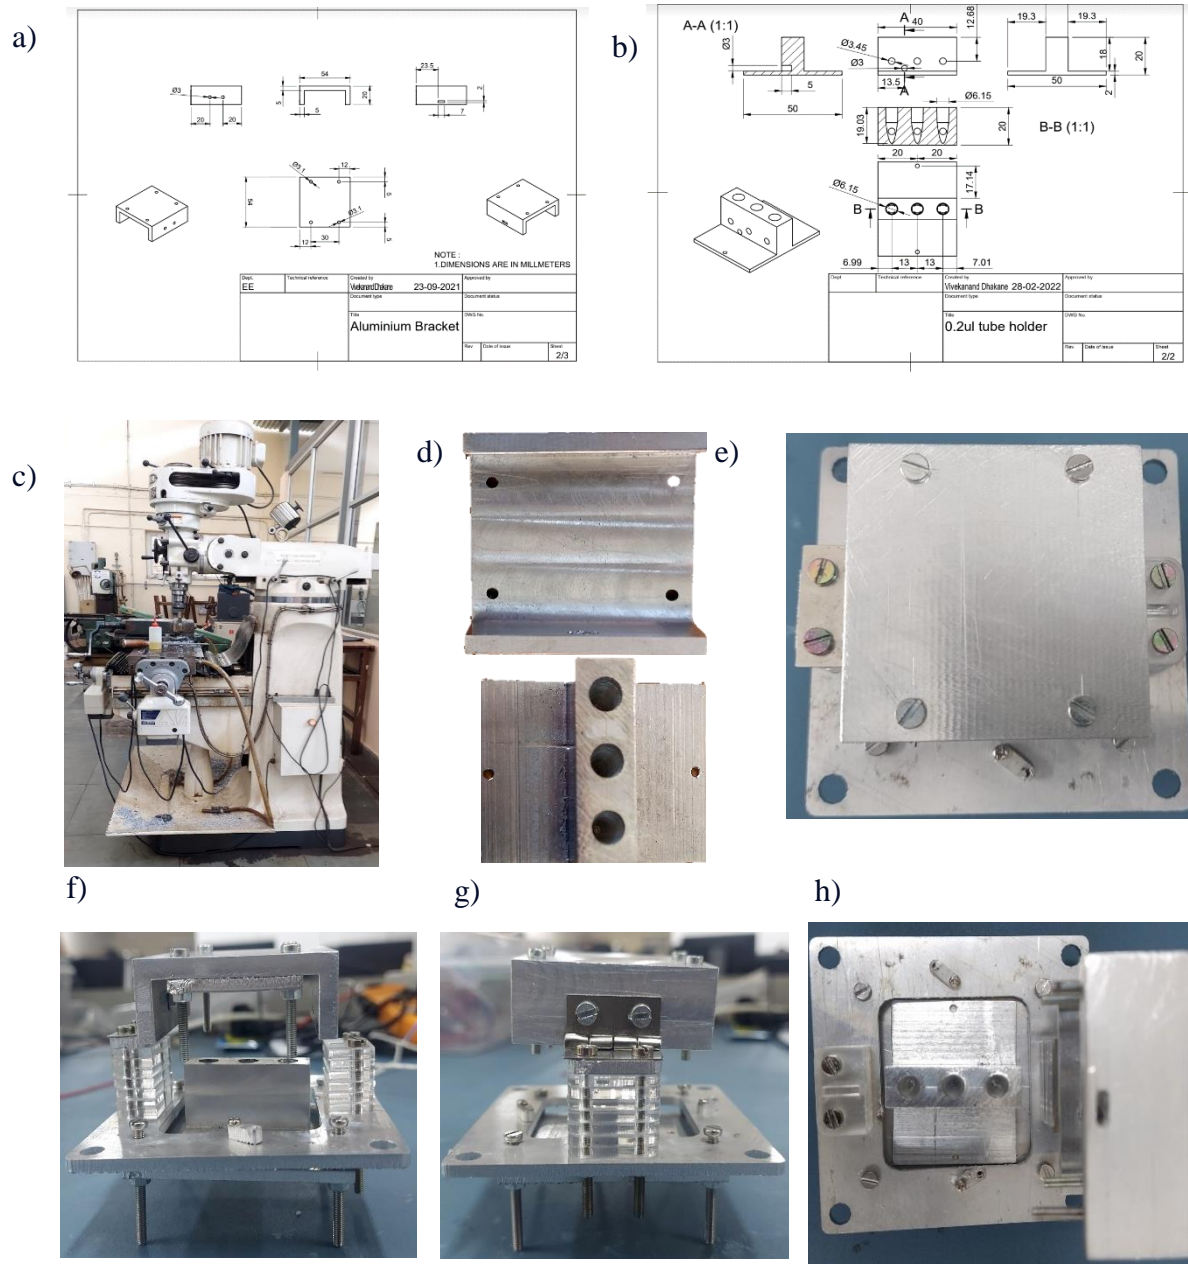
(a) Design of the heater lid (b) Design of tube holder (c) Milling machine at Machine and tool lab, IIT Bombay (d) Heater lid and tube holder made from aluminium block (e) Top view of the lid assembly while lid is closed (f) Front view of the tube holder and lid assembly (g) Left side view, hinge joint (h) Top view of the lid assembly while lid is open
